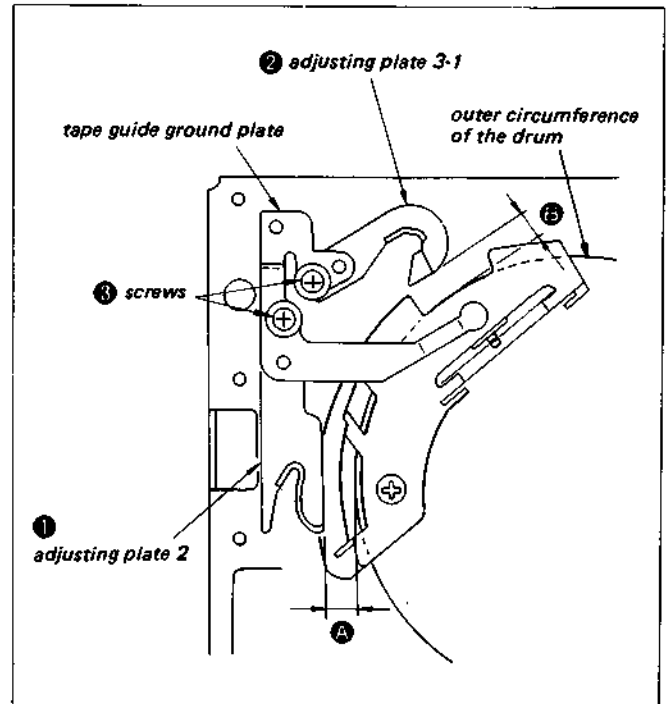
Measurement of the position of adjusting plates 2 and 3-1
